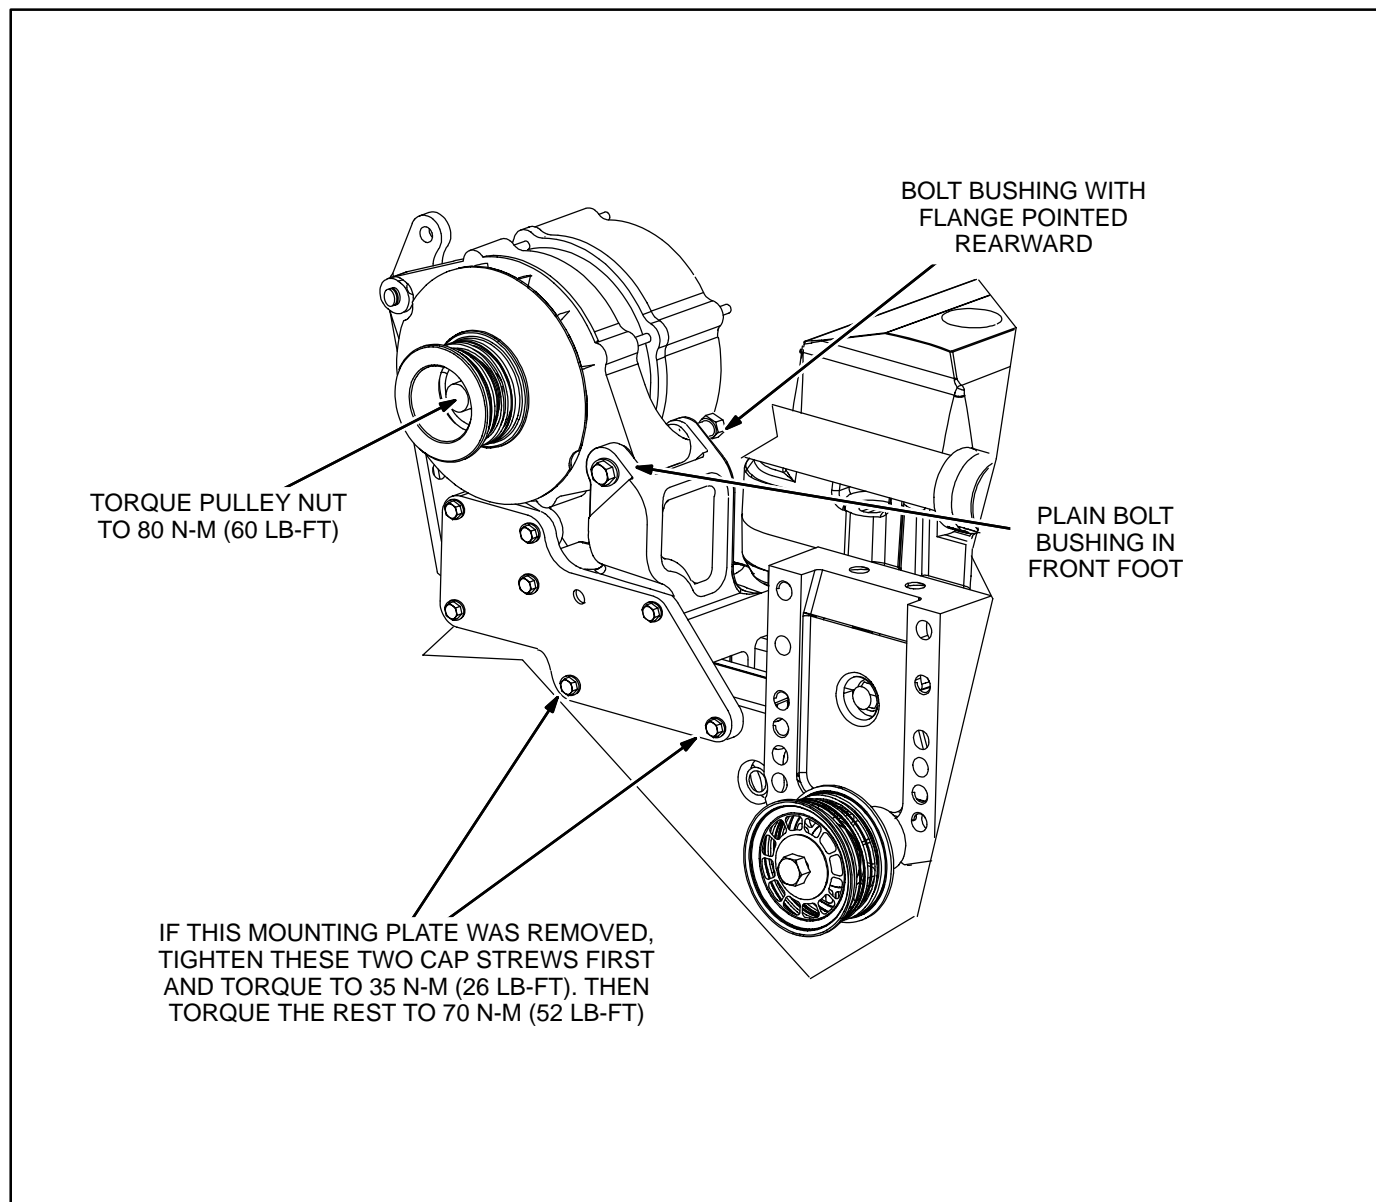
BATTERY CHARGING ALTERNATOR
